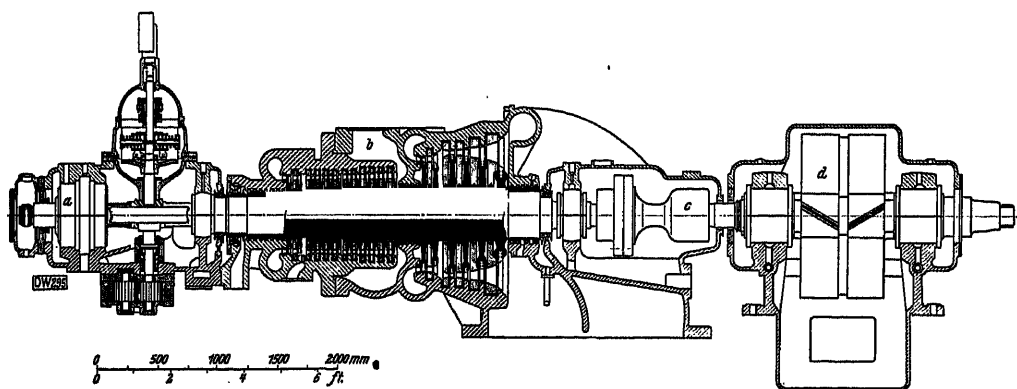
Erste Brünnner*, 1000 kw., 6000/1500 R.P.M., geared extraction turbine
